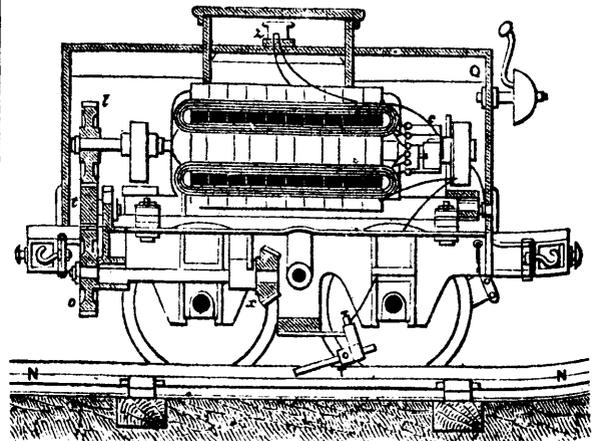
LONGITUDINAL SECTION OF MOTOR.
